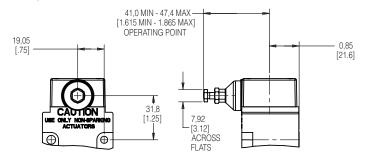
MICRO SWITCH BX2 Series Side Rotary Product Dimensions • mm [in] Side Rotary - Head Codes: A, P, AND R
